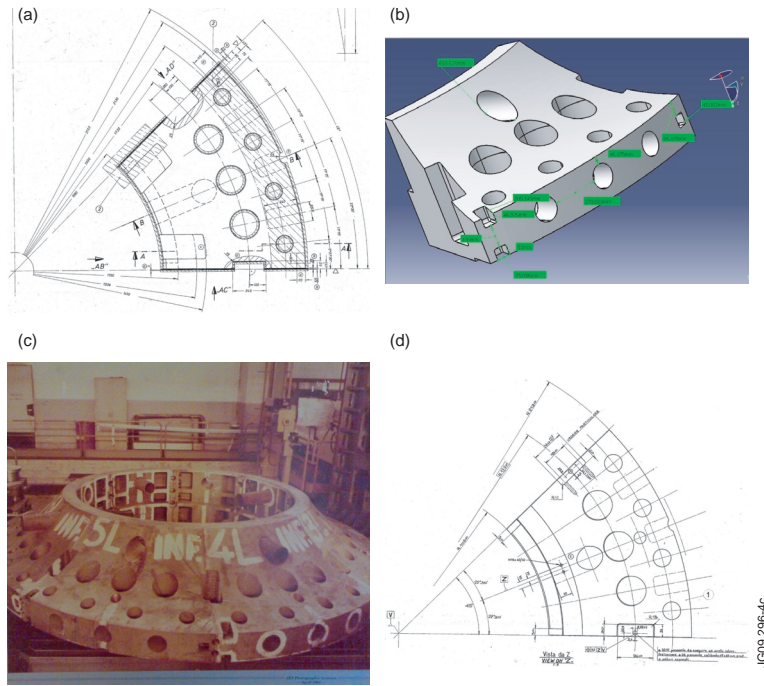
The Torsion Collar. (a) Particular from the original JET casting drawing D730-01-001 of the torsion collar component, where a smaller central through hole is missing, because it appears after machining. (b) CAD model of the torsion collar. (c) Picture of the complete torsion collar, taken during the construction phase of JET; the mentioned smaller hole is present. (d) Particular from the original JET assembly drawing D730-01-000 of the upper collar; the smaller central hole next to the larger central one is visible.
